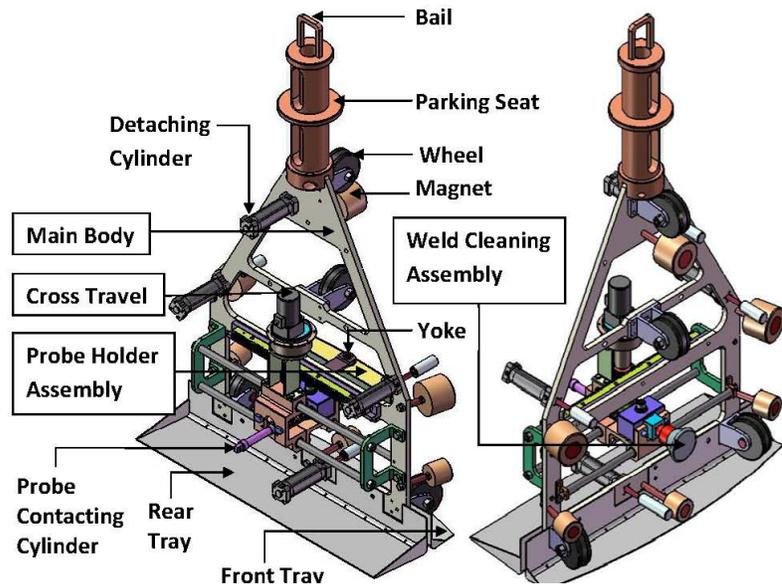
CAD Model of Weld Inspection Manipulator
